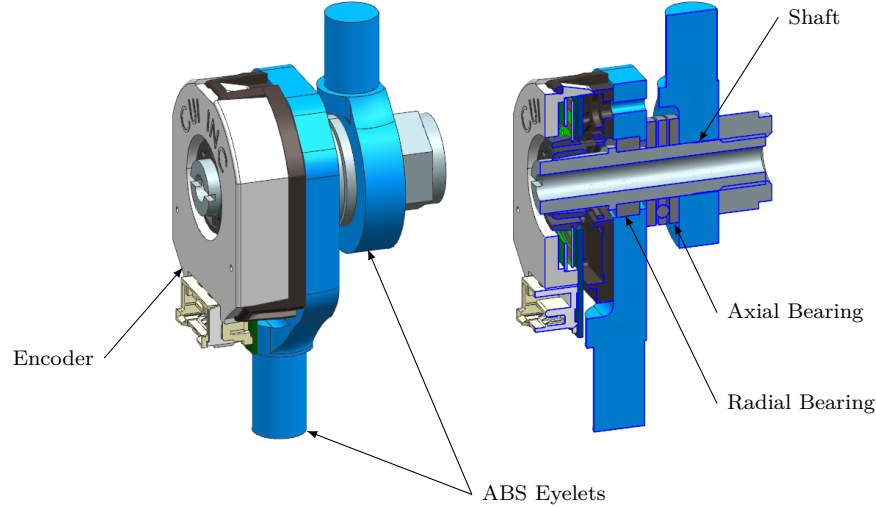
Design of the joint-encoder assembly. 3D model (left) and section view (right).
